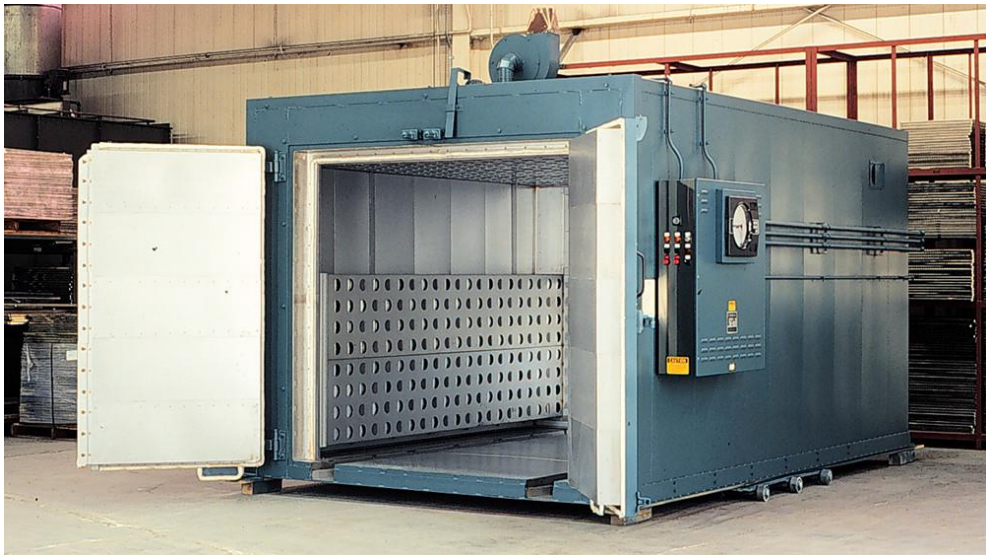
Industrial Oven (Industrial Quick Search Manufacturer Directory, s.f.)
